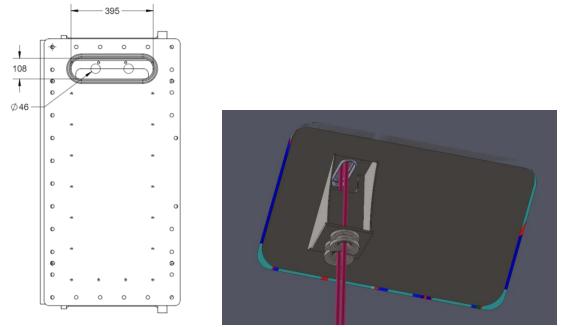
Hull opening dimension. Left: Bottom view of fairlead drawing (measurements in mm). Right:
